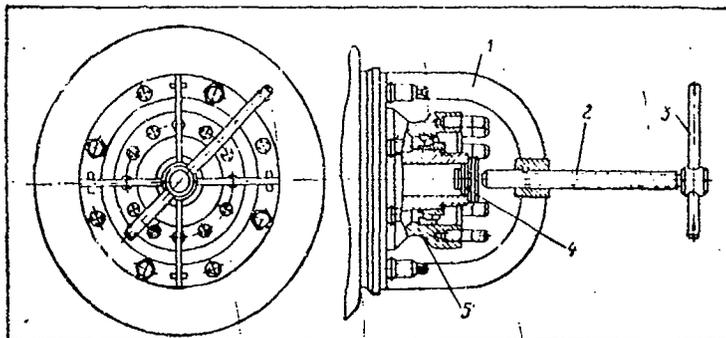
Removing the rear wheel hub of a ZIL-130
